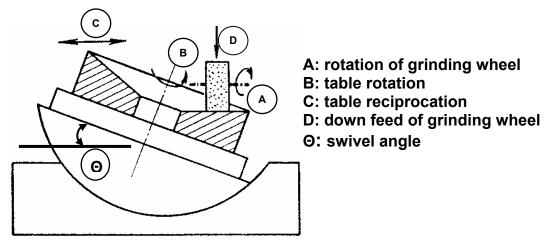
Grinding of a tapered surface in horizontal spindle rotary table surface grinder
